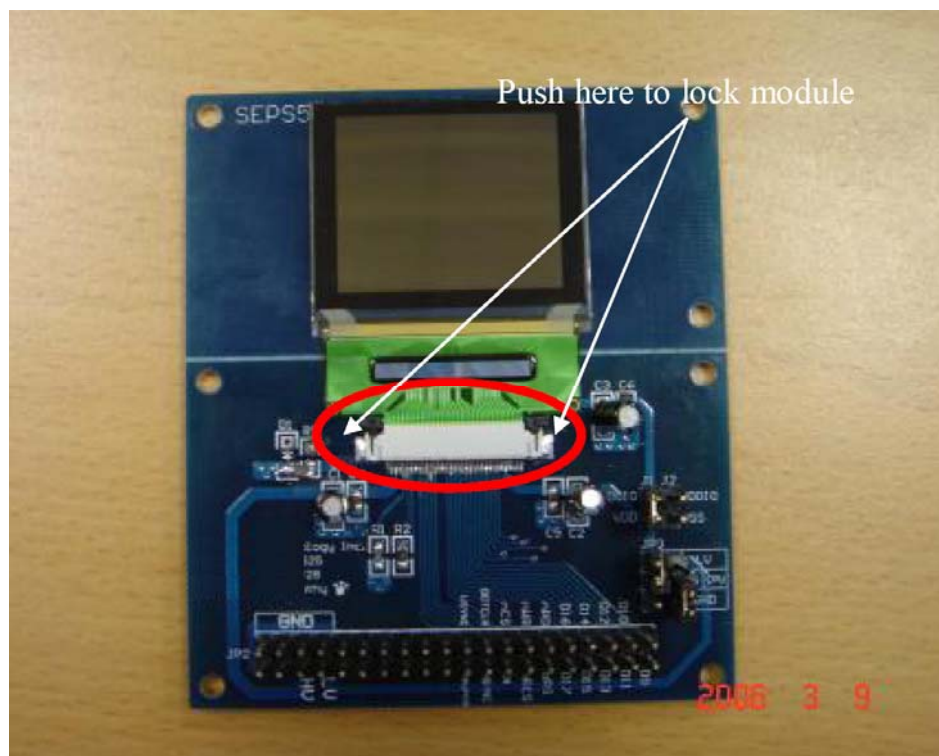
DD-160128FC-1A and EVK assembled (Top view)
